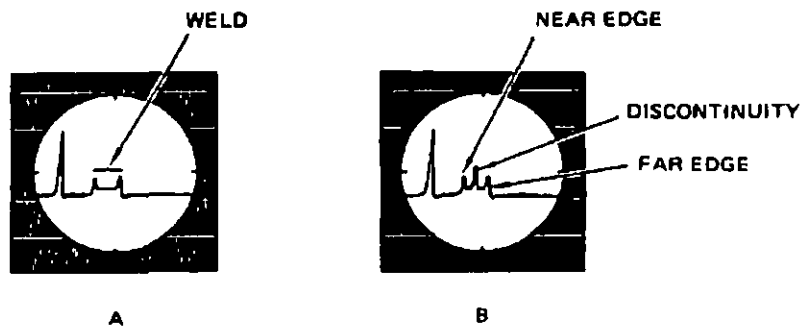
(18). Weld indications using angle-beam contact techniques.
